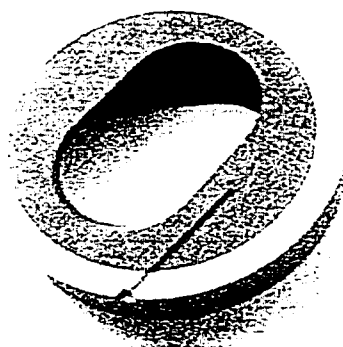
Photograph of thermocouple hole in stator cross-section.
